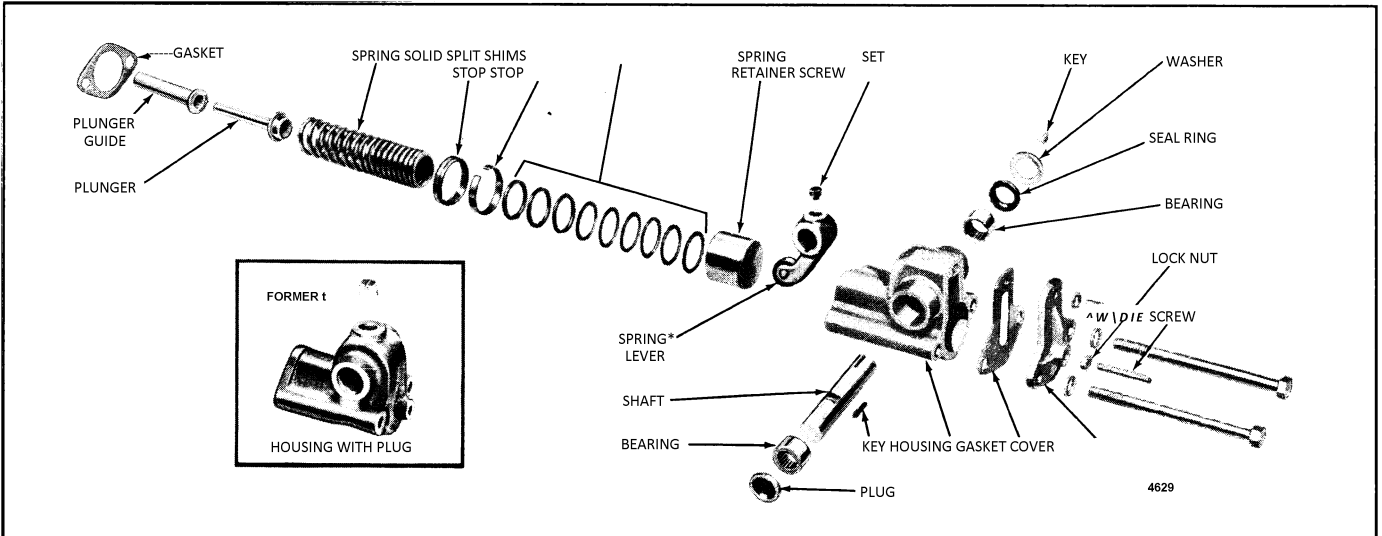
Variable Speed Spring Housing and Relative Location of Parts
